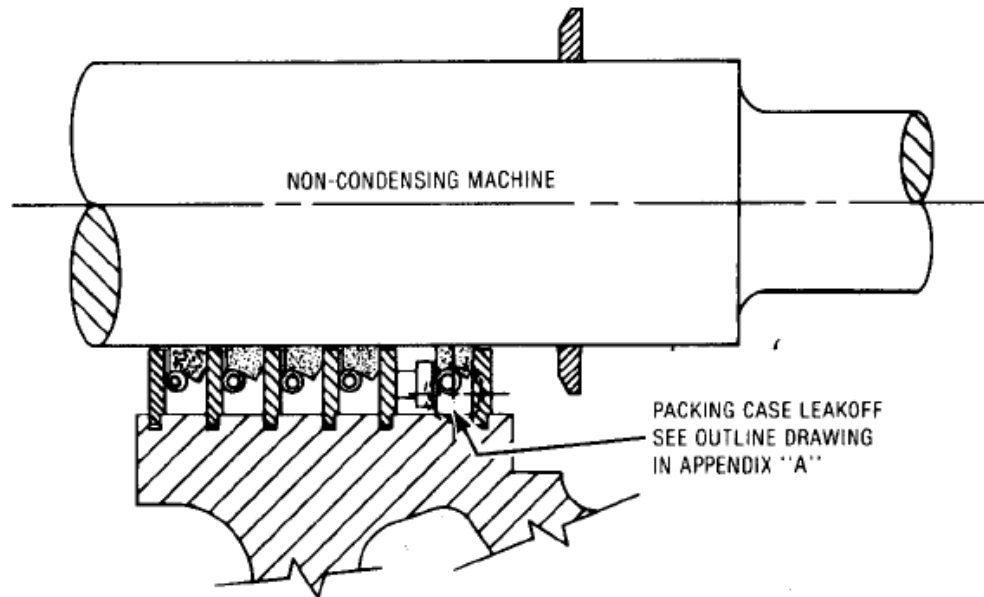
Carbon Ring Assembly, Non-Condensing Turbine
